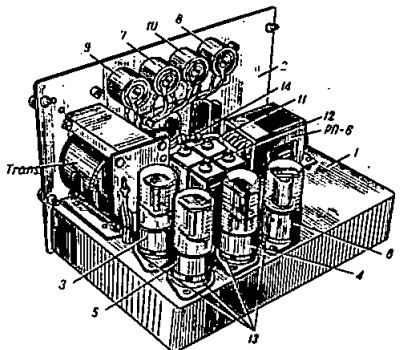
Amplifier 3T-BRM with Housing Removed (Rear View)
